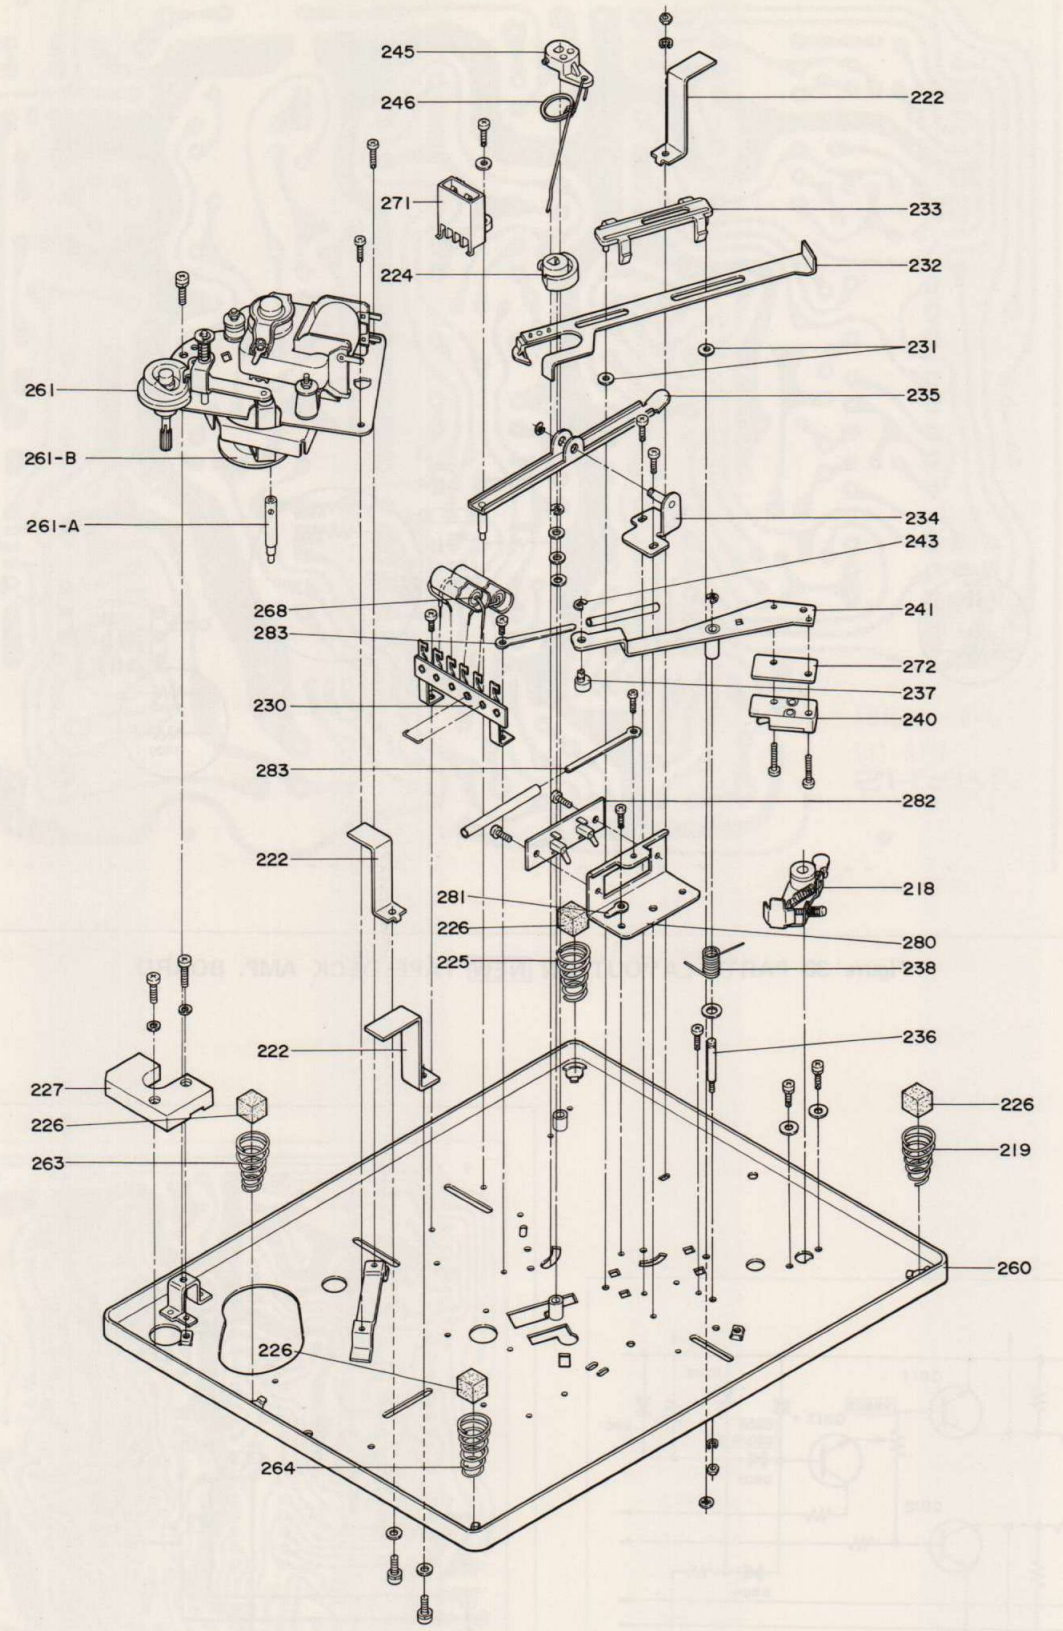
PLAYER EXPLODED BOTTOM VIEW
